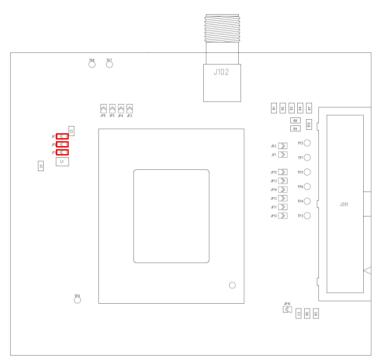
Default Soldering Configuration for Jumpers for the SL6087 Socket-Up Board
